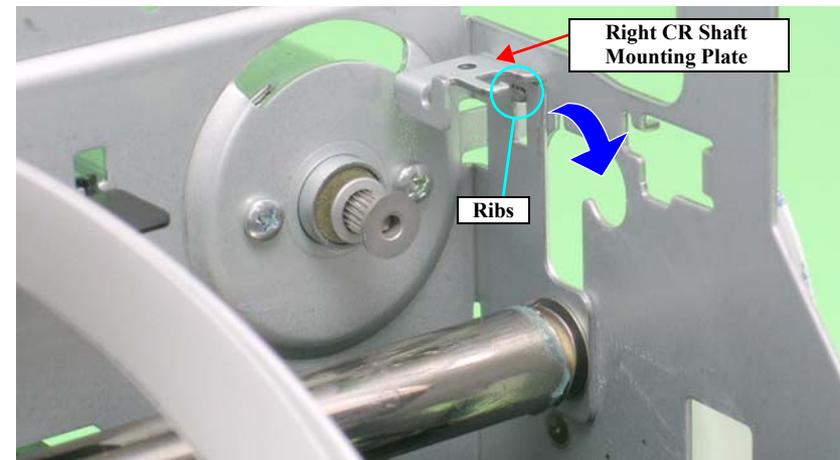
Rotating the Right CR Shaft Mounting Plate
